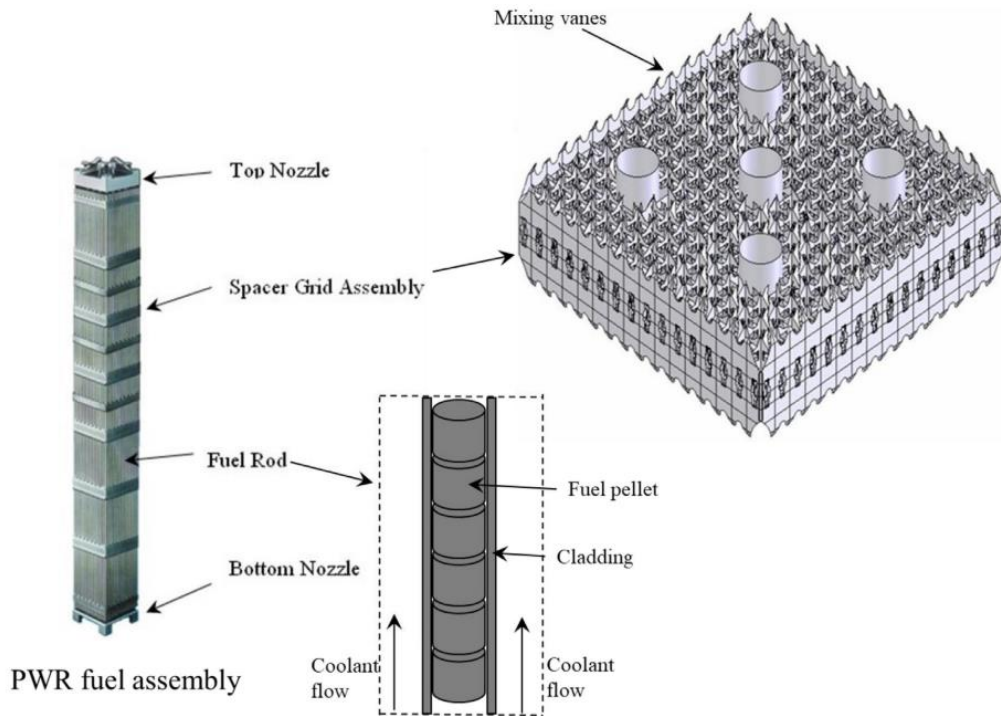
Schematic view of a PWR fuel assembly [8].
